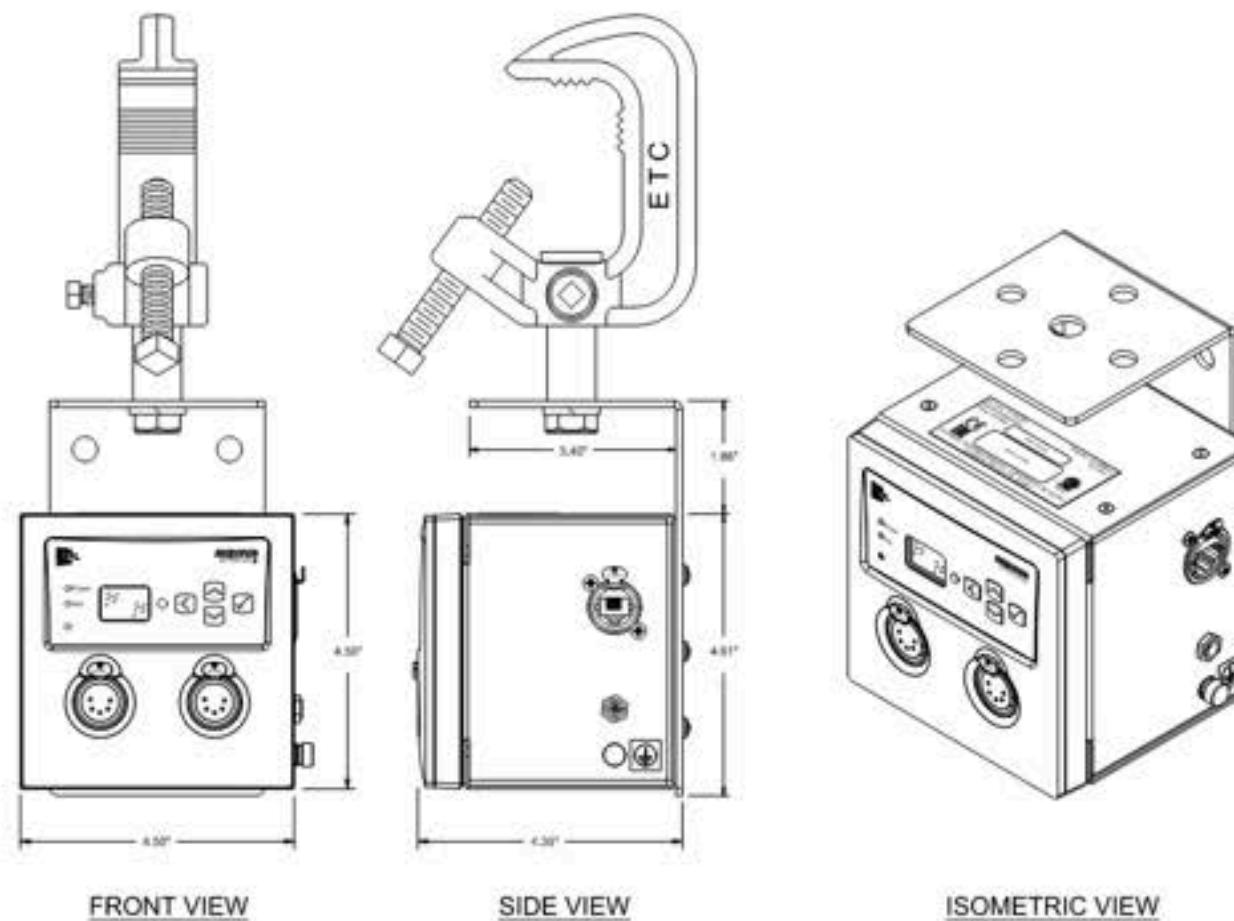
DIN elevation drawings with unit labels)
